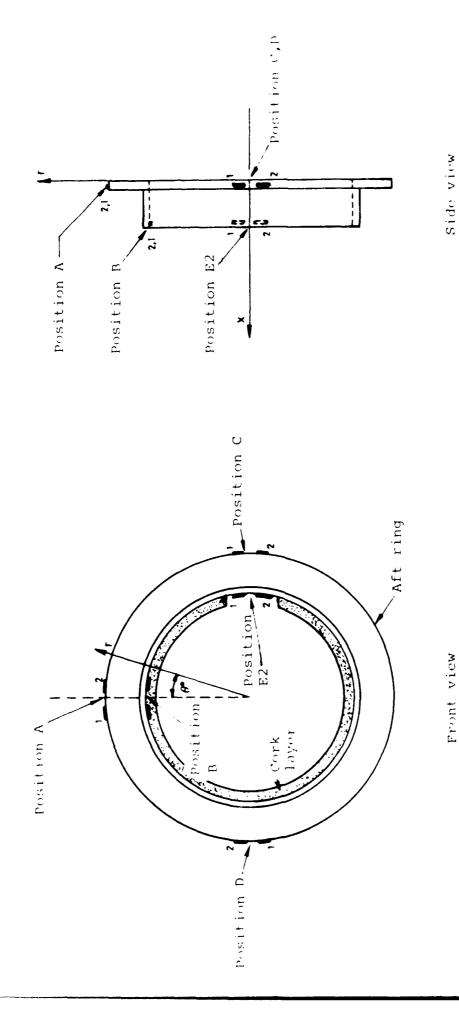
AFT RING GAUGE POSITIONS AND CO-ORDINATE AXES
